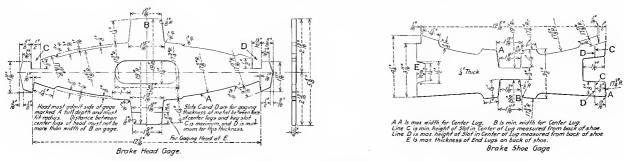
M. C. B. Standard Brake Head and Shoe Gages. (M. C. B. Sheet 17.)
